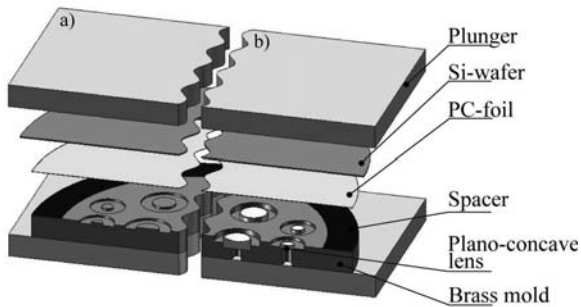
Fabrication process in a hot embossing machine for a lens chamber with a) a planar and b) a shaped membrane.
